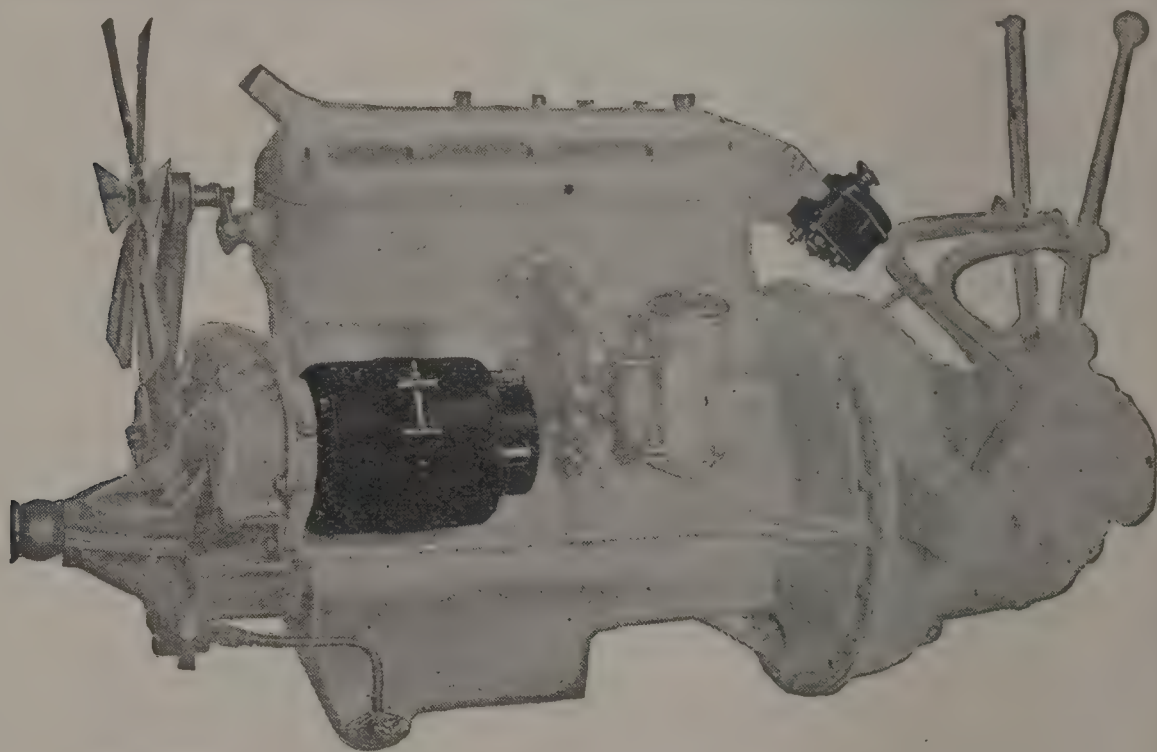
Inclosed gear housing as used with the North East system on a Dodge Bros. car
